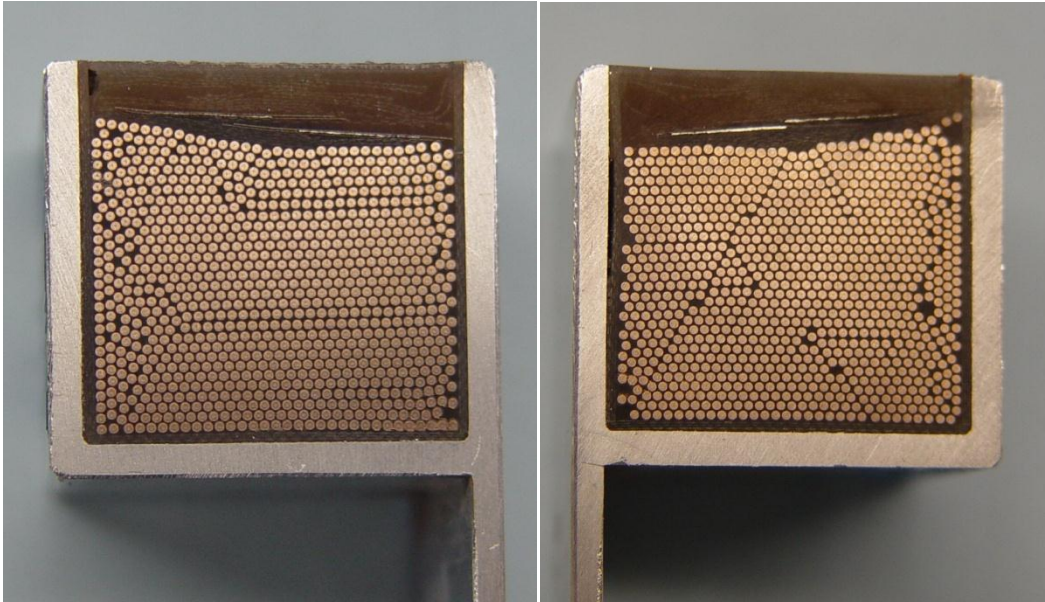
Sections of the damaged coil: center of straight section left, and right.
